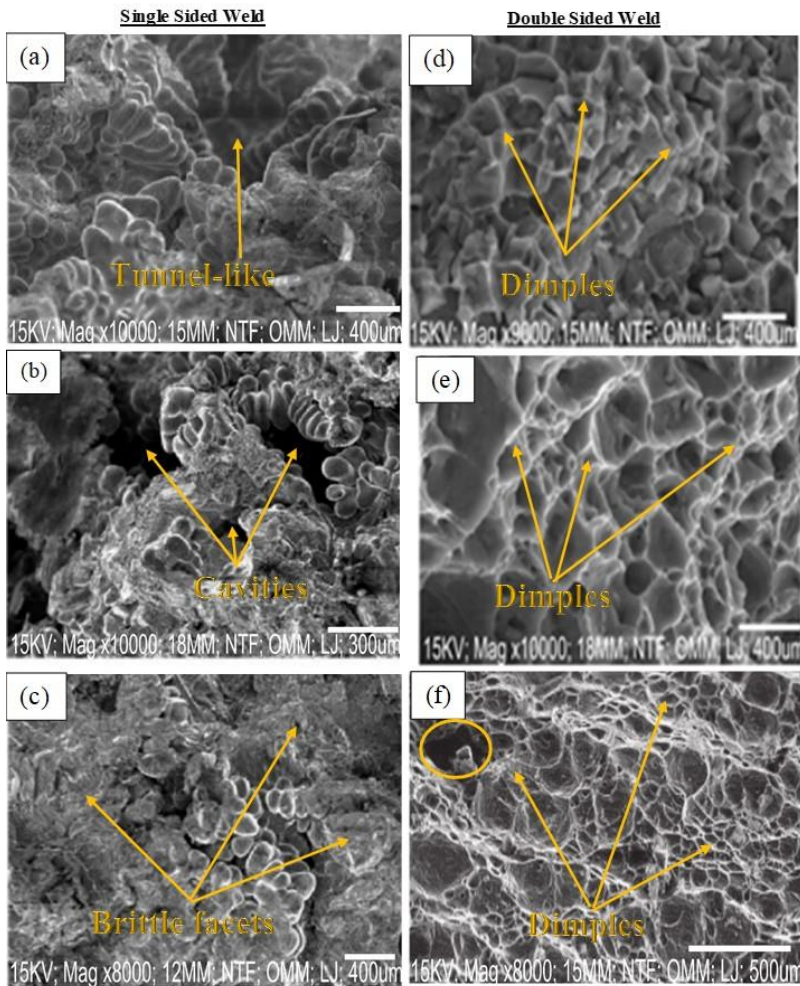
Fracture surfaces of the IFSW welds: the single-sided welds at (a) 710 rpm/40 mm/min, (b) 900 rpm/40 mm/min, (c) 1120 rpm/40 mm/min; and double-sided welds at (d) 710 rpm/40 mm/min, (e) 900 rpm/40 mm/min, (f) 1120 rpm/40 mm/min
